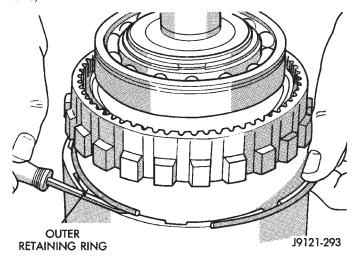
Clutch Drum And Outer Retaining Ring Installation
